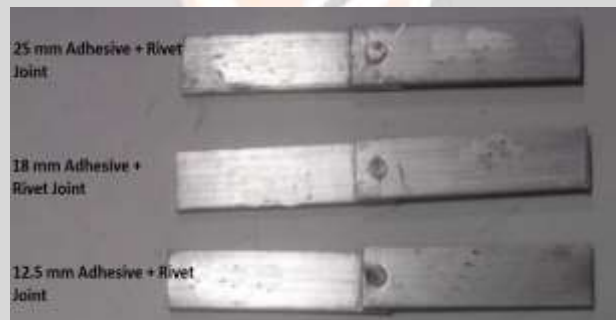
Actual Specimen of Rivet + Adhesive joint having lap length 12.5mm, 18 mm & 25 mm
